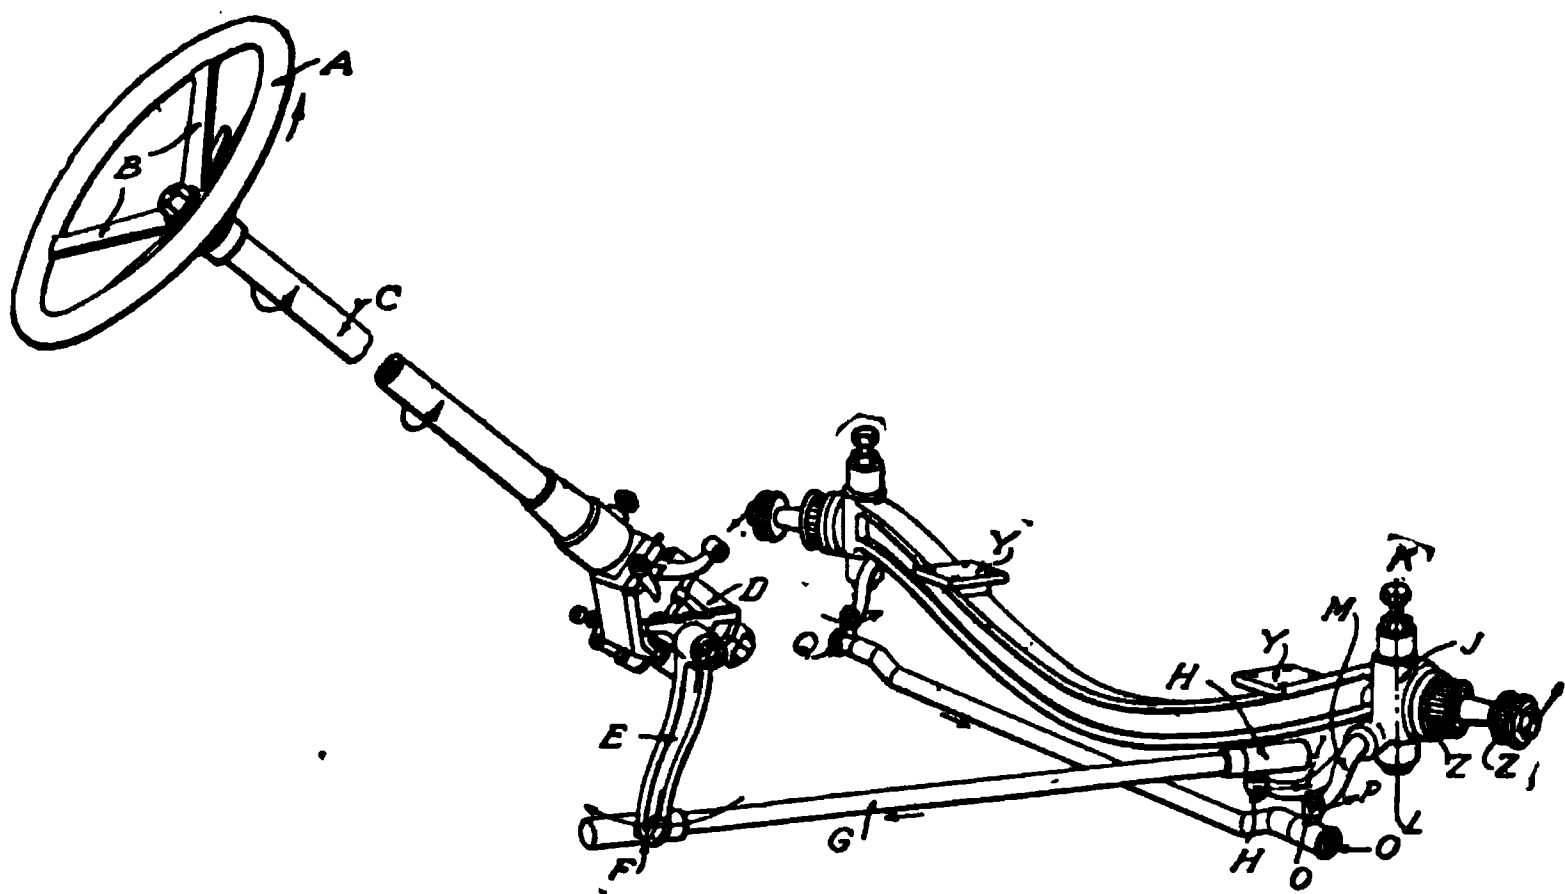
Steering Mechanism and Front Axle of Pierce-Arrow Car
